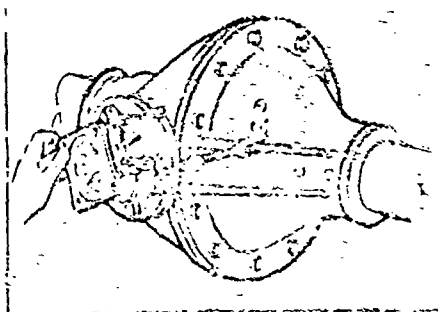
Method of checking the clearance between the drive axle final drive gear teeth of a ZIL-157K motor vehicle
